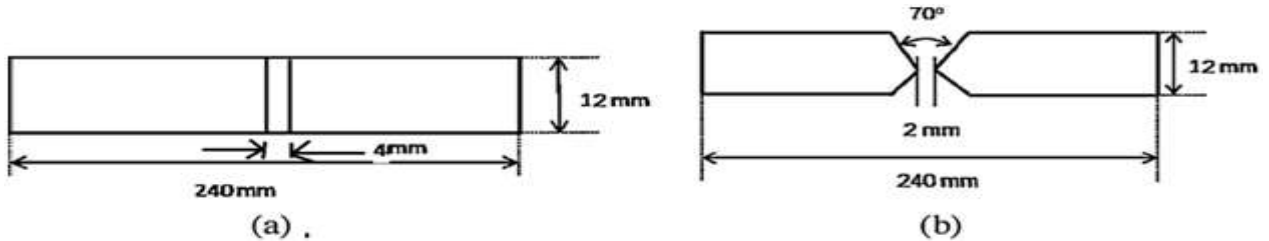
Schematic sketch showing joint configurations (a) square butt joint (b) double V-joint.
